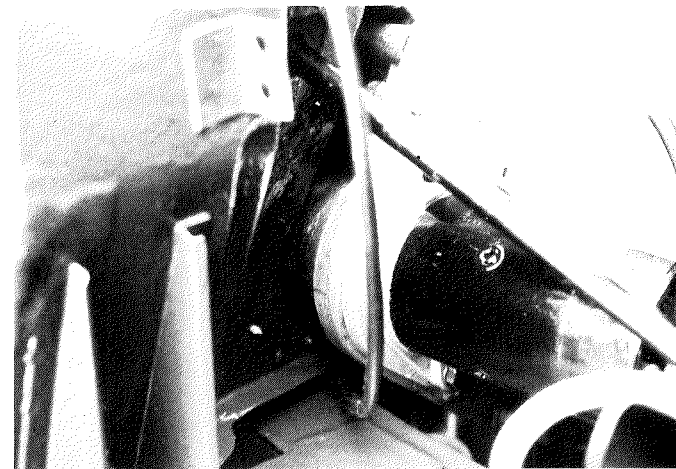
The bulkhead must be cut away to clear the starter motor bulge in the bellhousing
